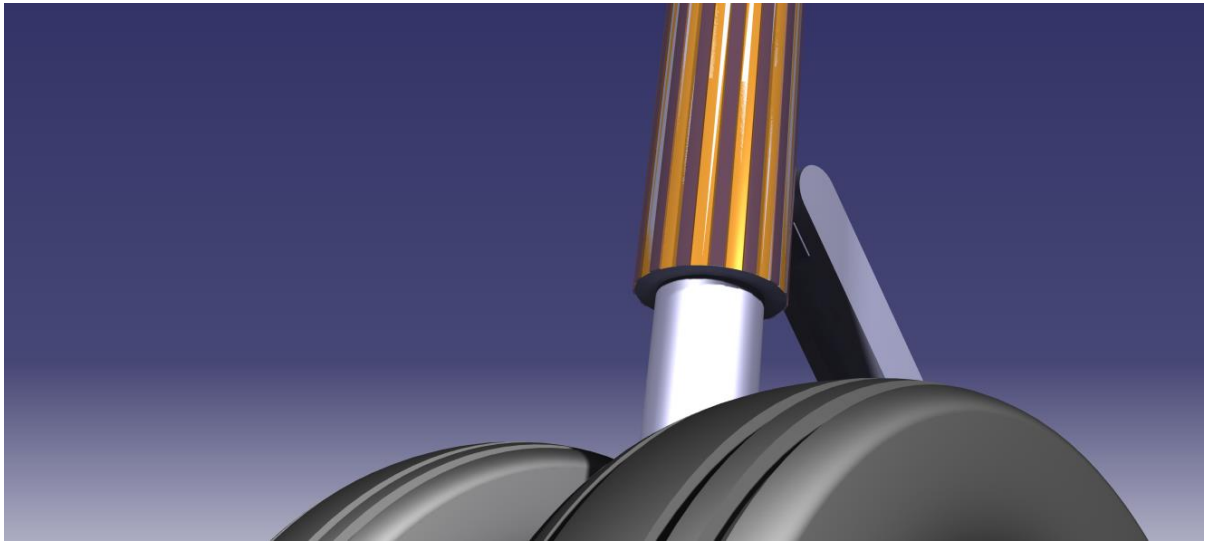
Final Rendered view of the Nose Landing Gear fitted with the multi-electrode DBD Plasma Actuators (Close up view)
